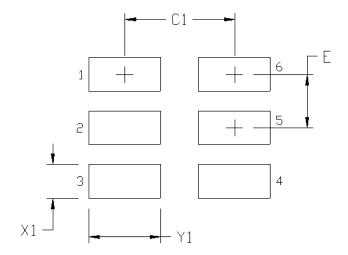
Si546 (3.2×5 mm) PCB Land Pattern
